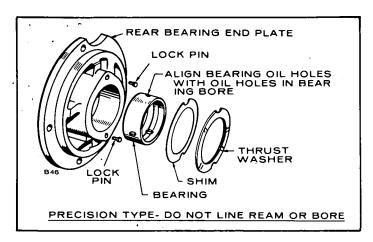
BEARINGS FOR REAR BEARING PLATE
